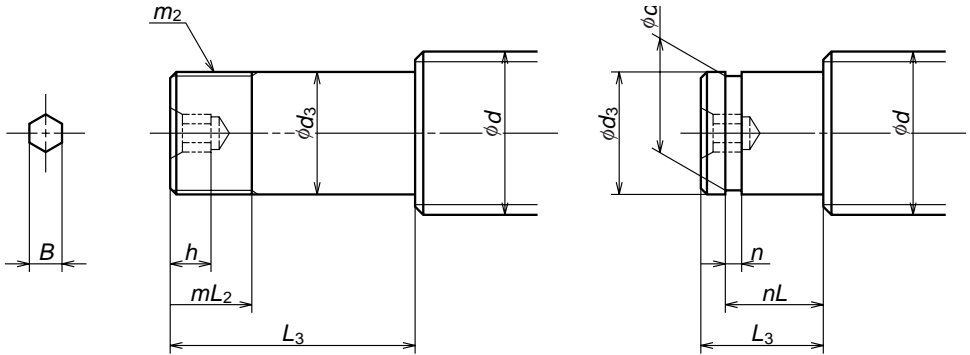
Standard shaft end configuration (opposite to the drive side)
